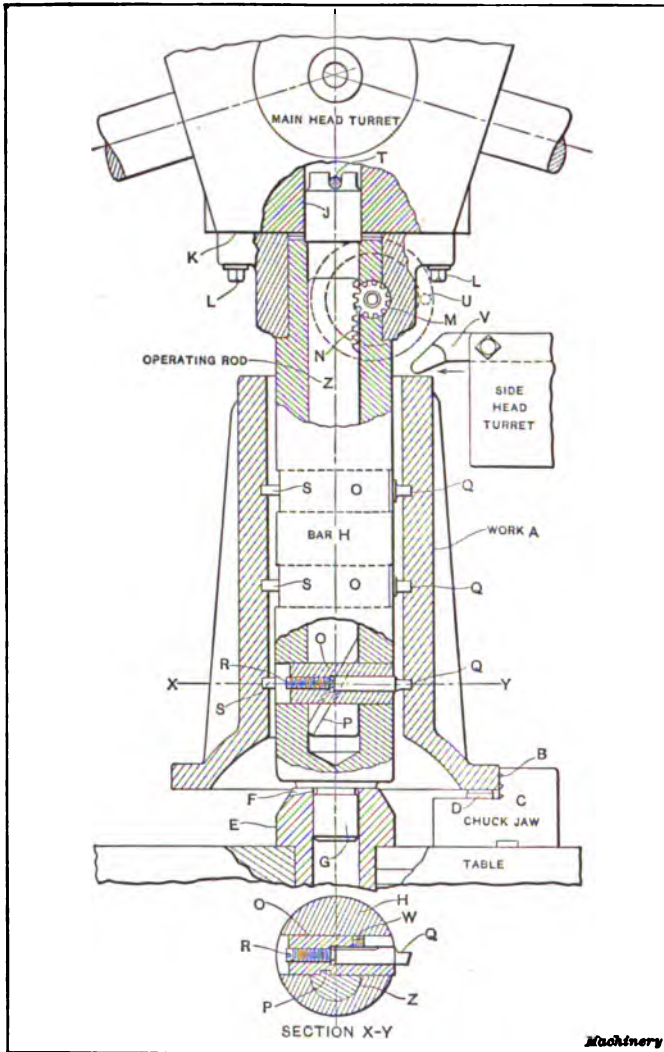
A Multiple Recessing Tool used in a Vertical Turret Lathe
